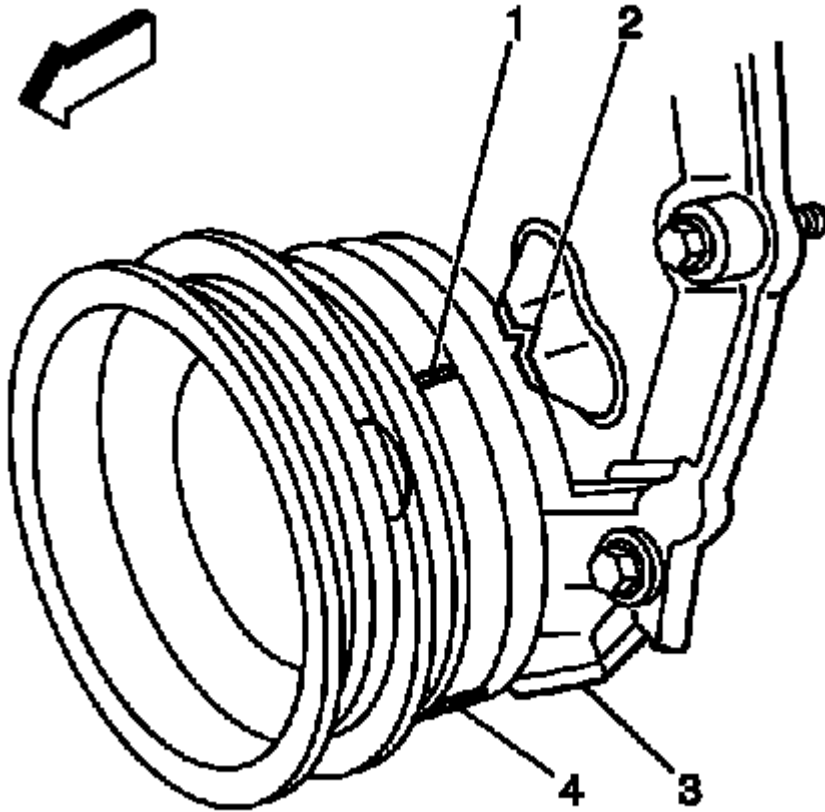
View Of Crankshaft Balancer Alignment Mark & Engine Front Cover Alignment Tab
